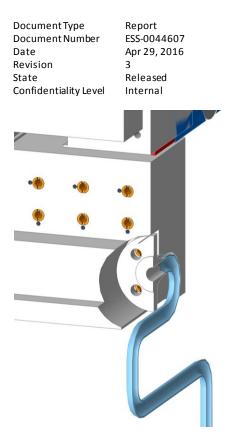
Cross-section of the large helium feed compliant stub. The oversized holes and the RH bolts with aligning nose, will combine to self-align the vessel side flange to wherever the flange on the spider might be.
